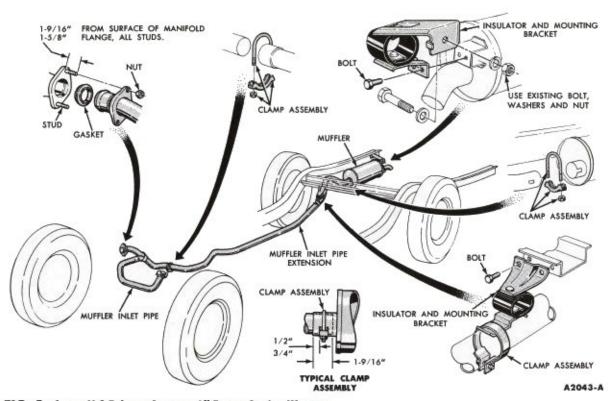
Comet V-8 Exhaust System—All Except Station Wagons
